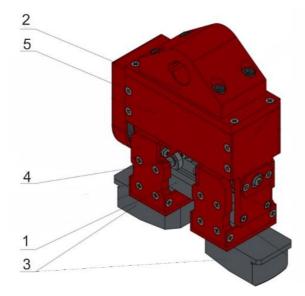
Proposed design of the gripper: 1 - guides, flange 2, 3 - gripper jaws, 4 - rollers, 5 - casing.
